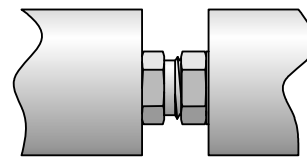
F50HAO for close coupling of components with two SAE Straight thread ports
